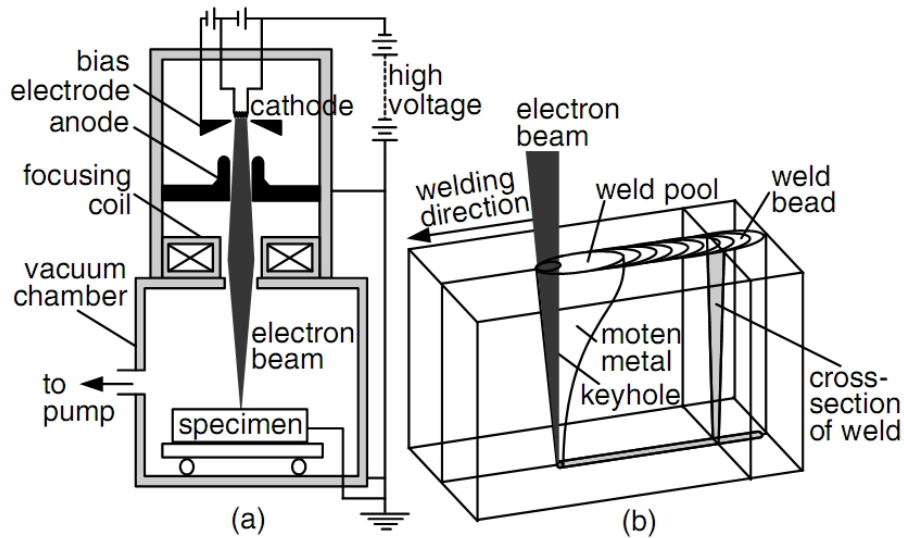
Schematic of electron beam welding. (a) Process (b) Keyhole. *Image courtesy: Sindo K., Welding Metallurgy, Wiley Interscience, 2003
